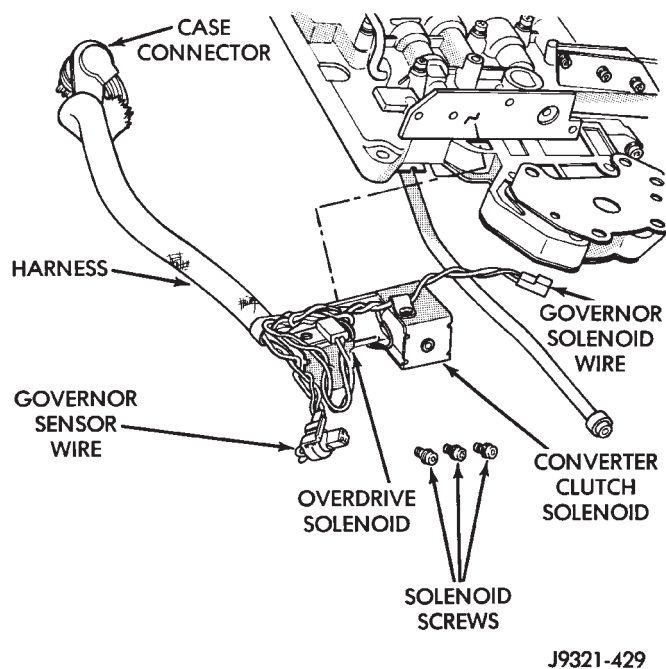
Overdrive/Converter Clutch Solenoid Assembly Removal
